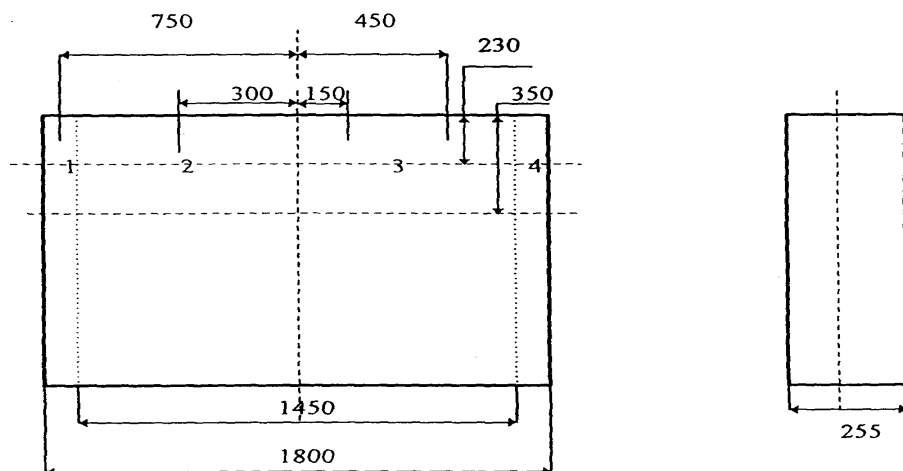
Geometrical details of mould faces (dimensions in mm)
